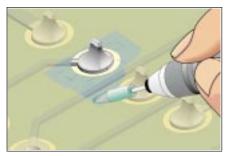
Rubberized abrasives used to remove thin, hard coating.
